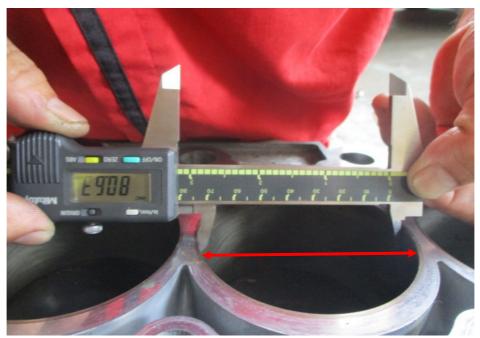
shows measurement being carried out to the bore (arrowed) of cylinder 2 of the Honda engine. The bore measurement of cylinder 2 was recorded to be 80.63mm.
